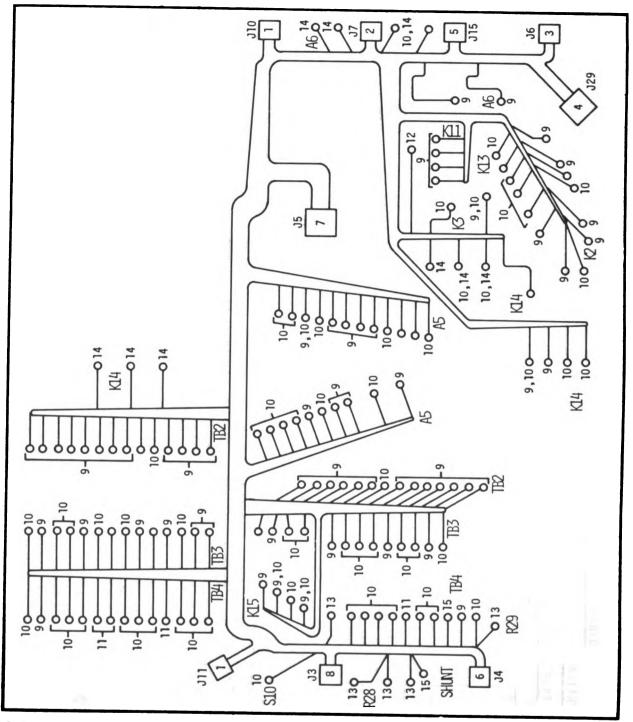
Relay box, disassembly and reassembly (Sheet 1 of 8).
